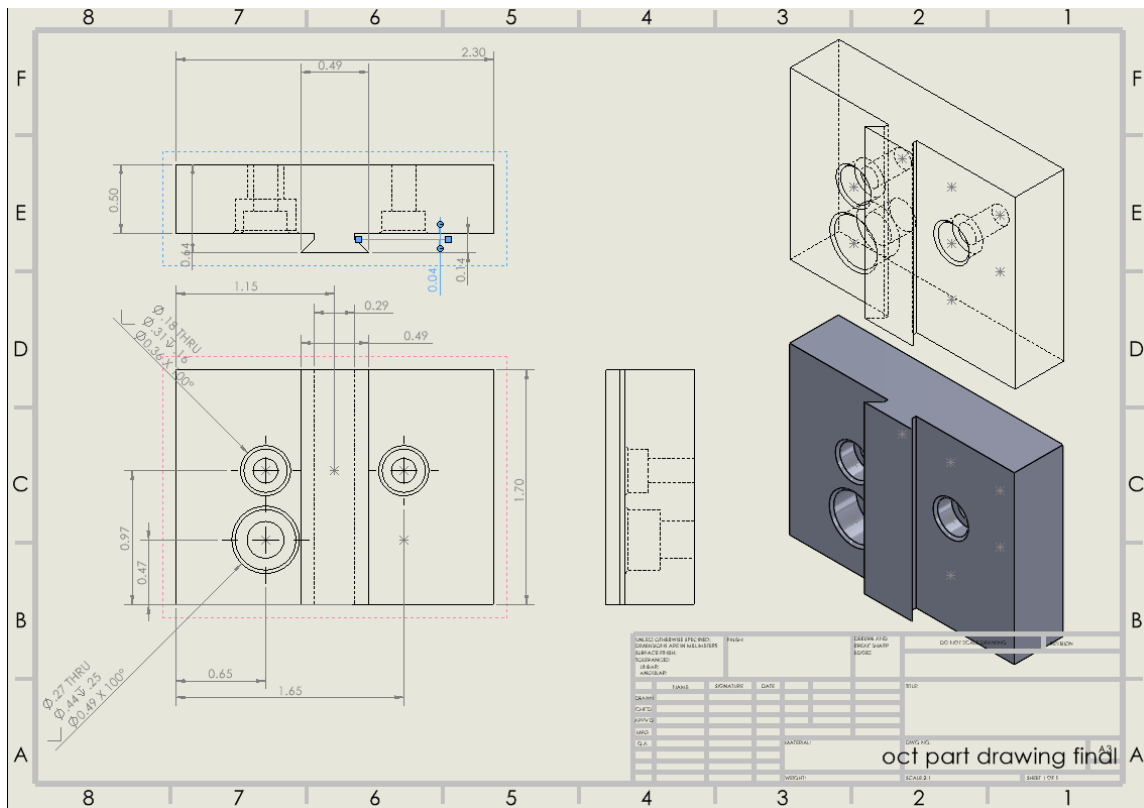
Engineering Drawing of Connector: The engineering drawing for the connector part between the galvanometer housing and OCT stand is depicted in the above image.
